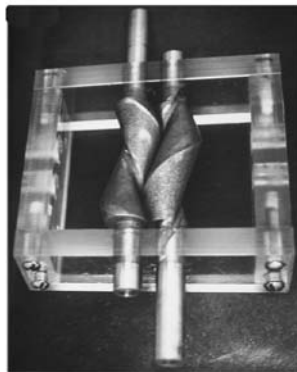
Model of cylindrical oblique toothed gearing with numbers of teeth on the wheels $z_2 = z_1 = 2$
